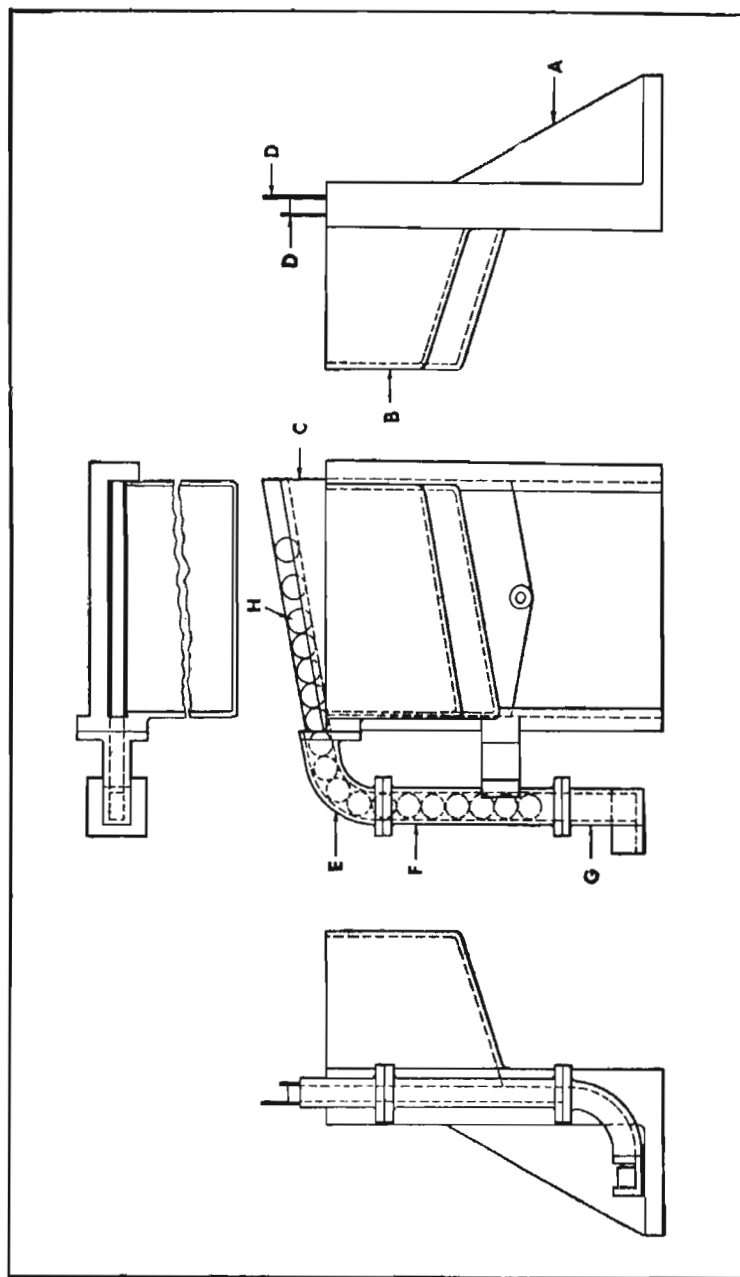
Hopper Feed with Reciprocating Slide C Arranged for Handling Cylindrical Parts.
